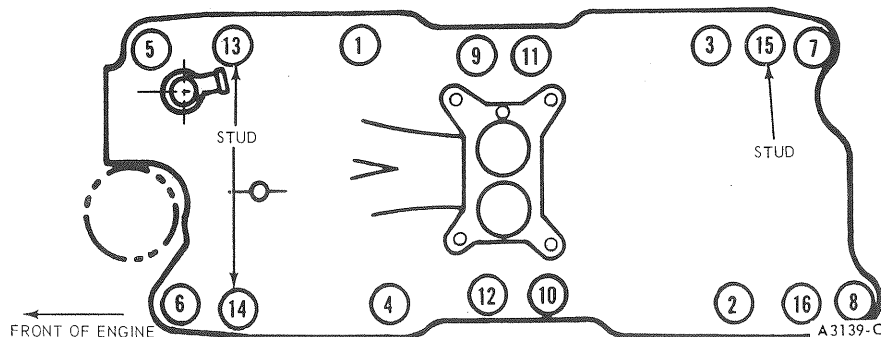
Intake Manifold Bolt Tightening Sequence — 351W Engine
